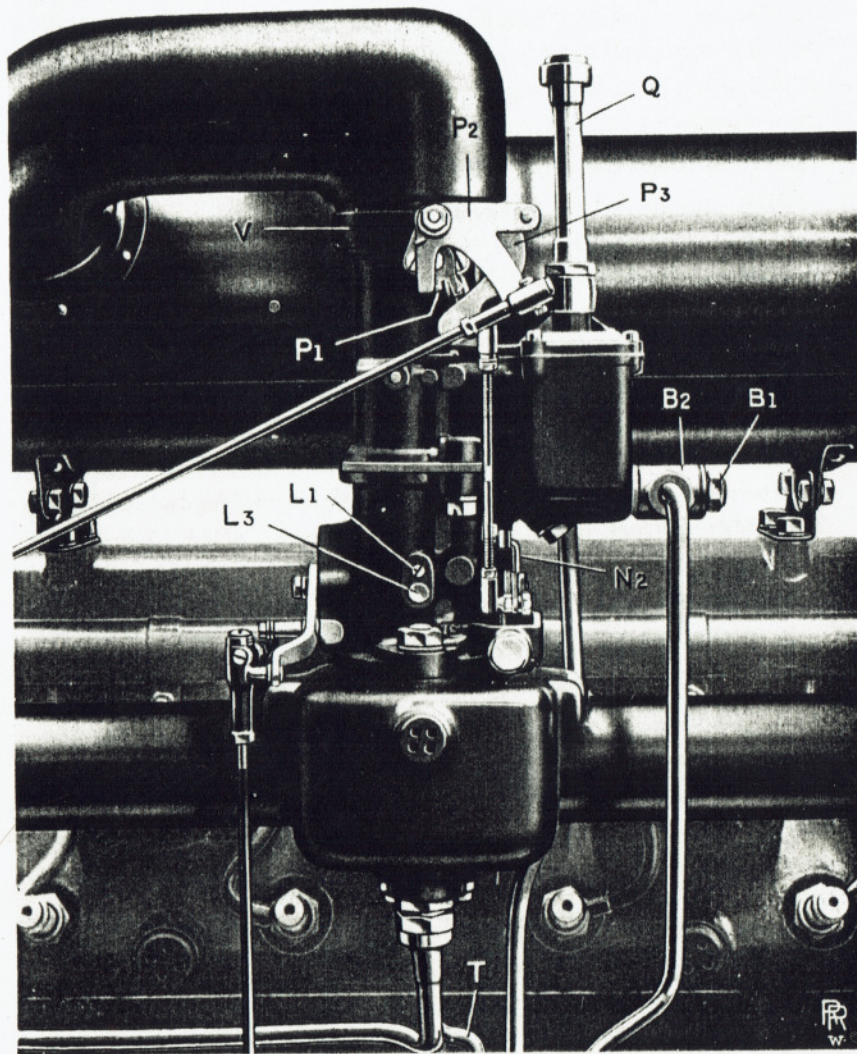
CARBURETTER IN POSITION ON ENGINE.
